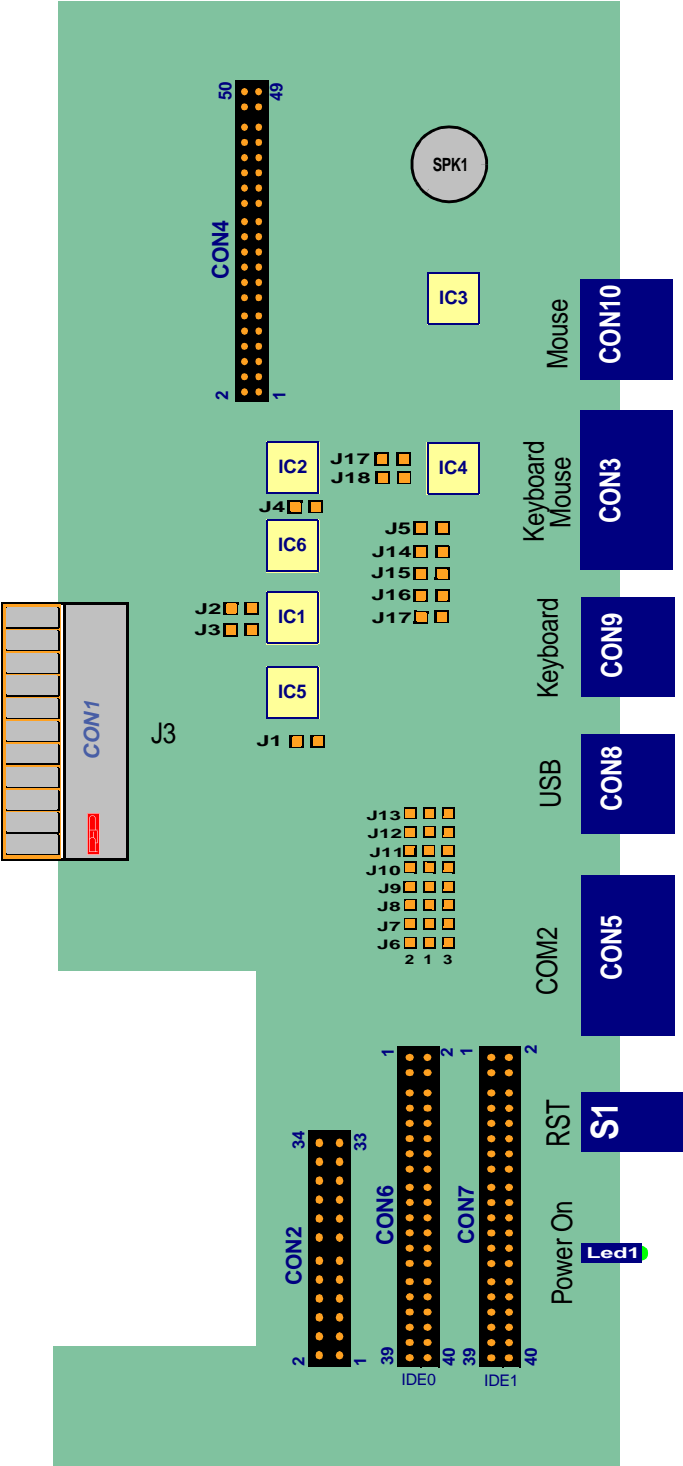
Front Panel View of CP-RIO6-10 Rear I/O Module
